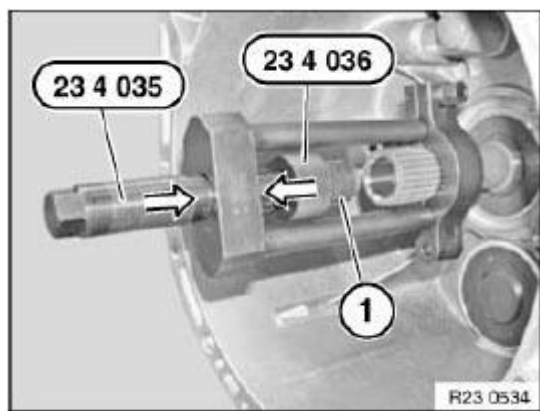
Pushing Roller Bearing Onto Thrust Piece
